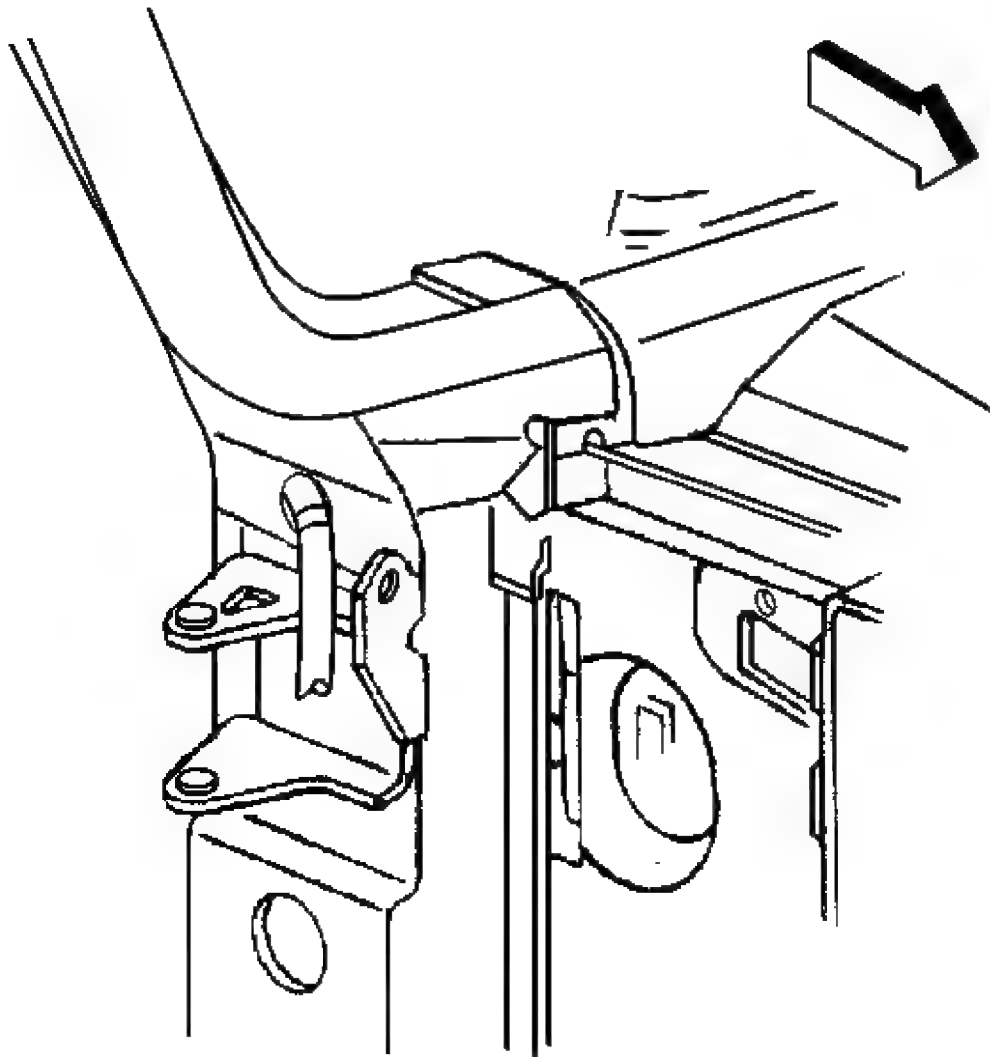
Inserting Hose Through Hole In Outer Sheet Metal
